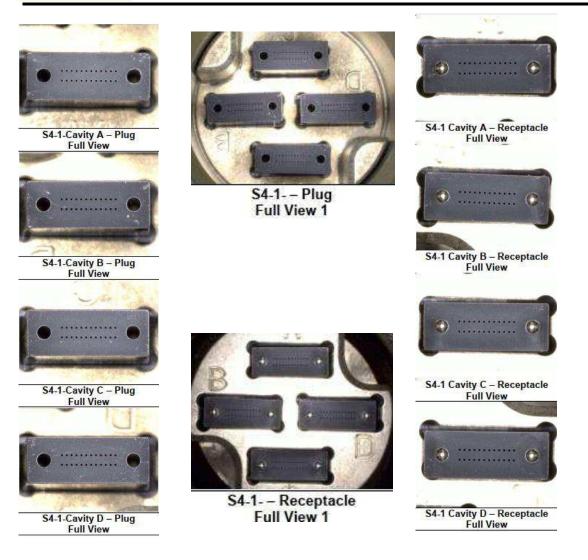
Sample Inspection - Typical Pre/Post Test End Face Inspection
